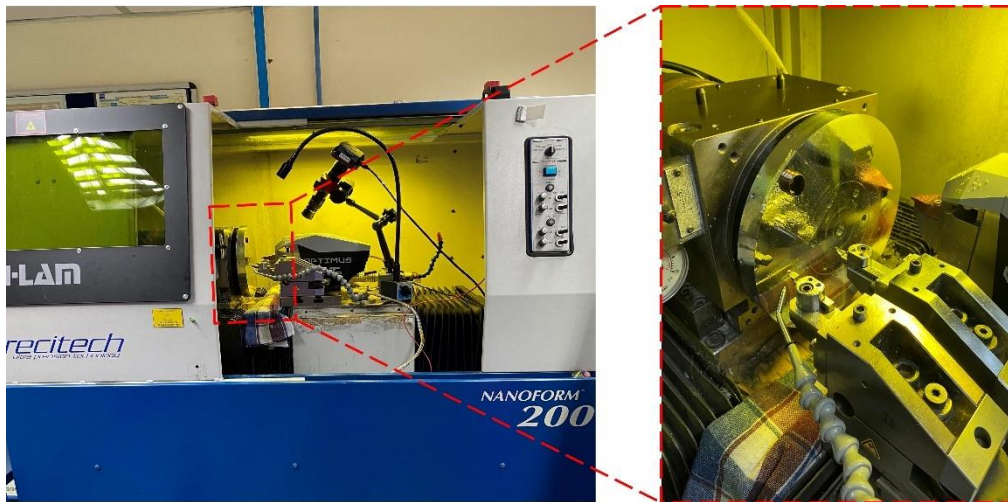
The SPDT (a multi-axis Precitech 700G ultra-precision machine tool) instrument setup [Ref @ Integrated Manufacturing, Mechanical Design and Fab Facility (MDF)].
